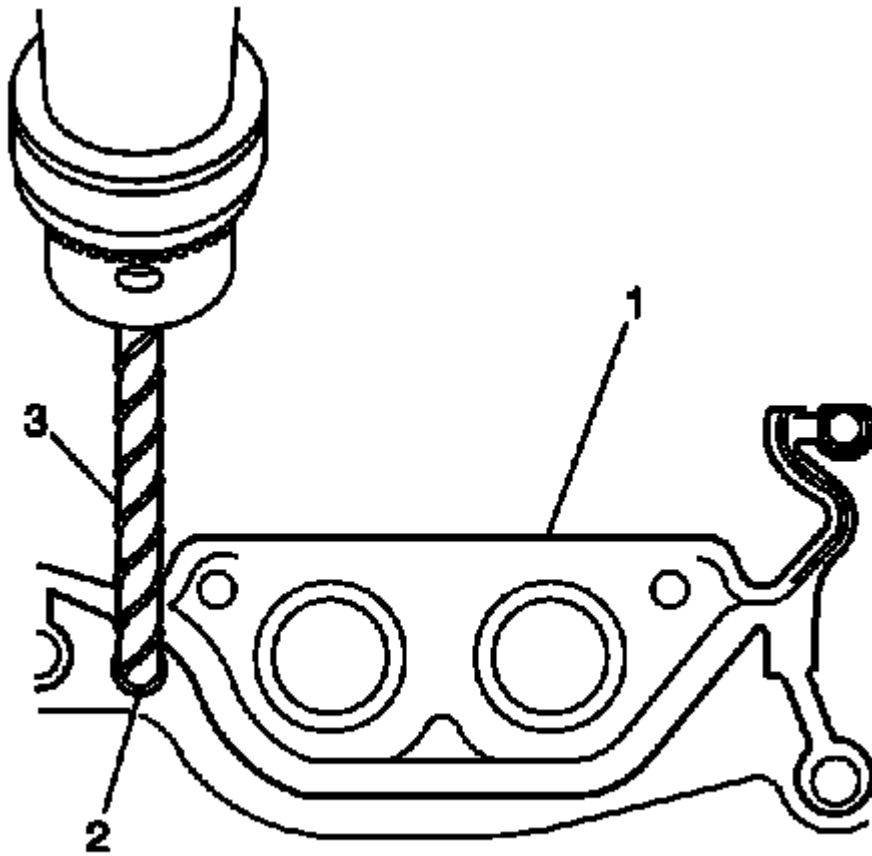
Drilling Oil Pan Gasket Retaining Rivets
